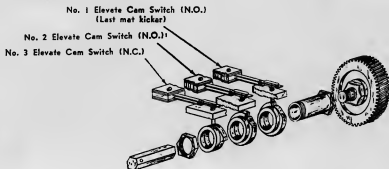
Teletypesetter Operating Unit Cam Switch Assembly
